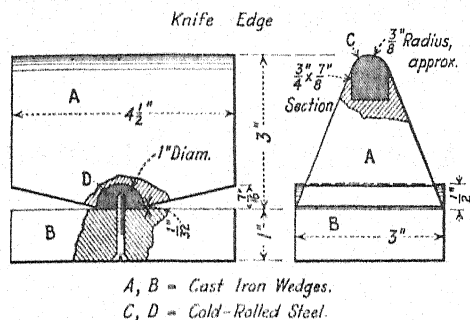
Self-Adjusting Knife-Edge Bearing and Load-Application Device.
